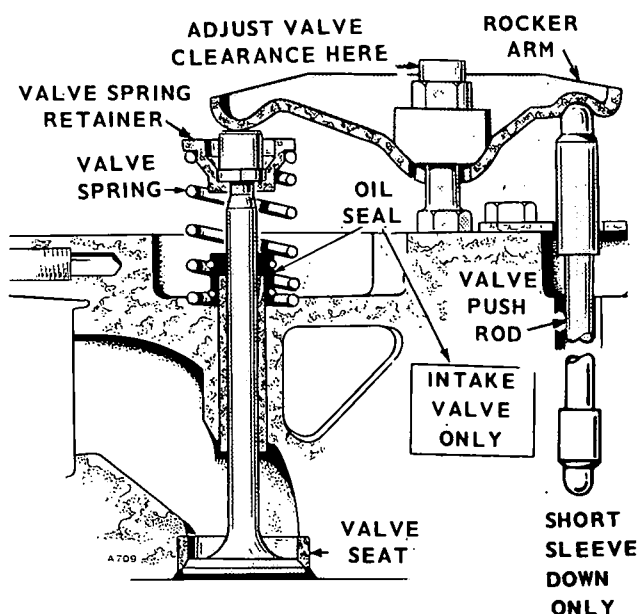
VALVE CLEARANCE ADJUSTMENTS
